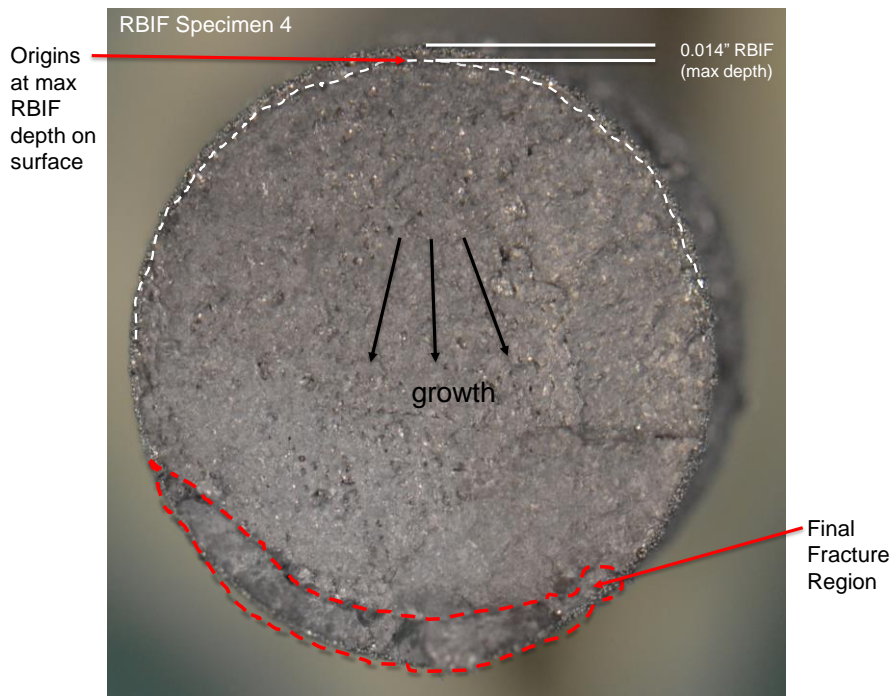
Fracture Surface Photograph of RBIF Specimens 4 ~10X Magnification
